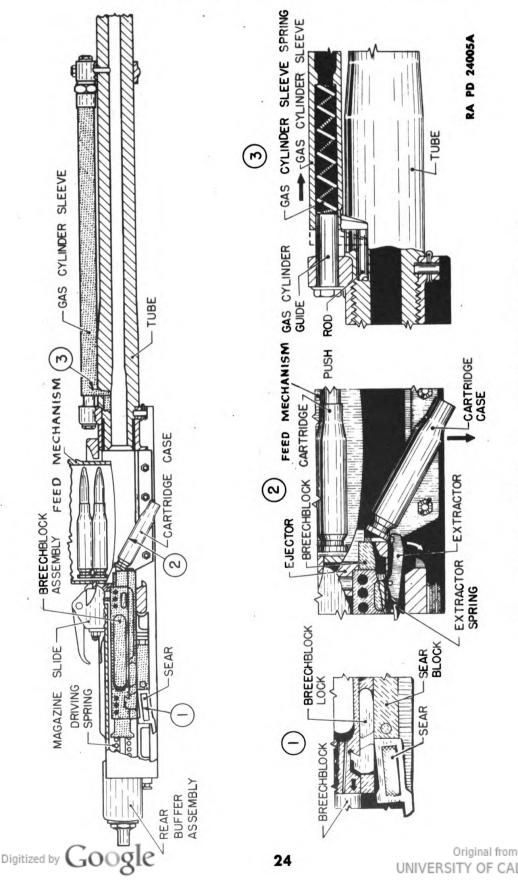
Gun Mechanism — Cartridge Being Ejected
